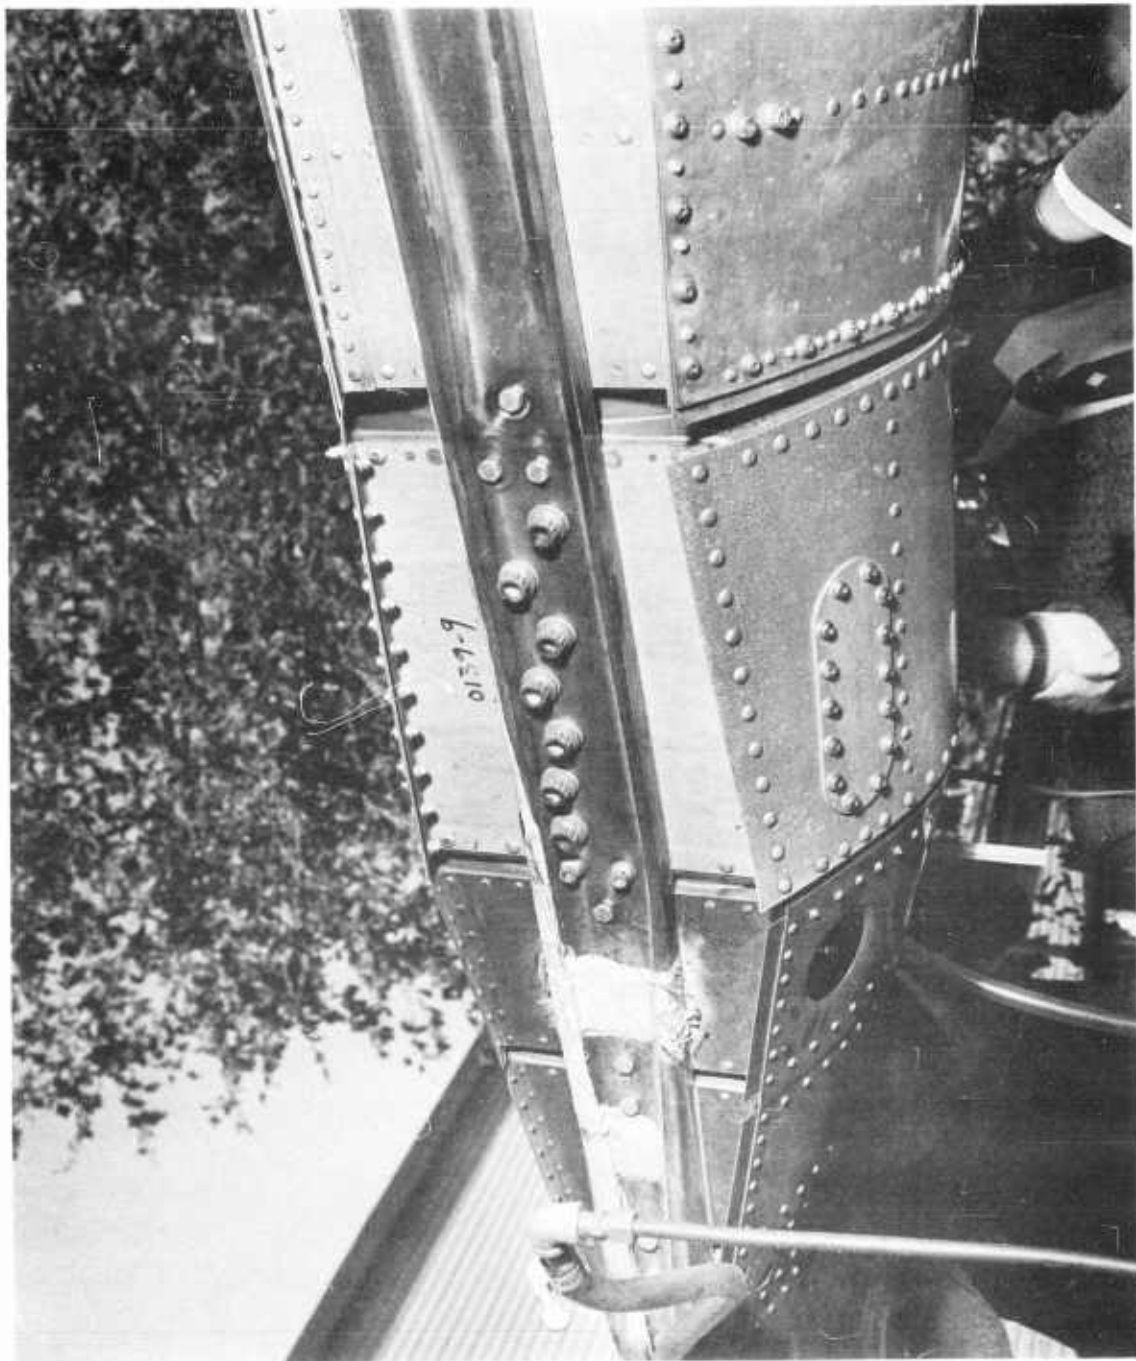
Front Spar Cooling Tube Arrangement and Typical Strain Gage Installation
